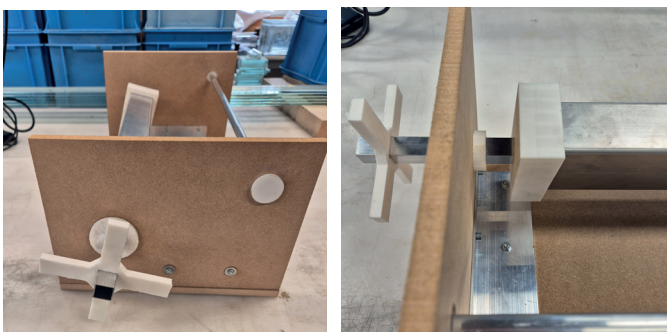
Larger filament winding machine for the final profile geometry detailing (own image)
